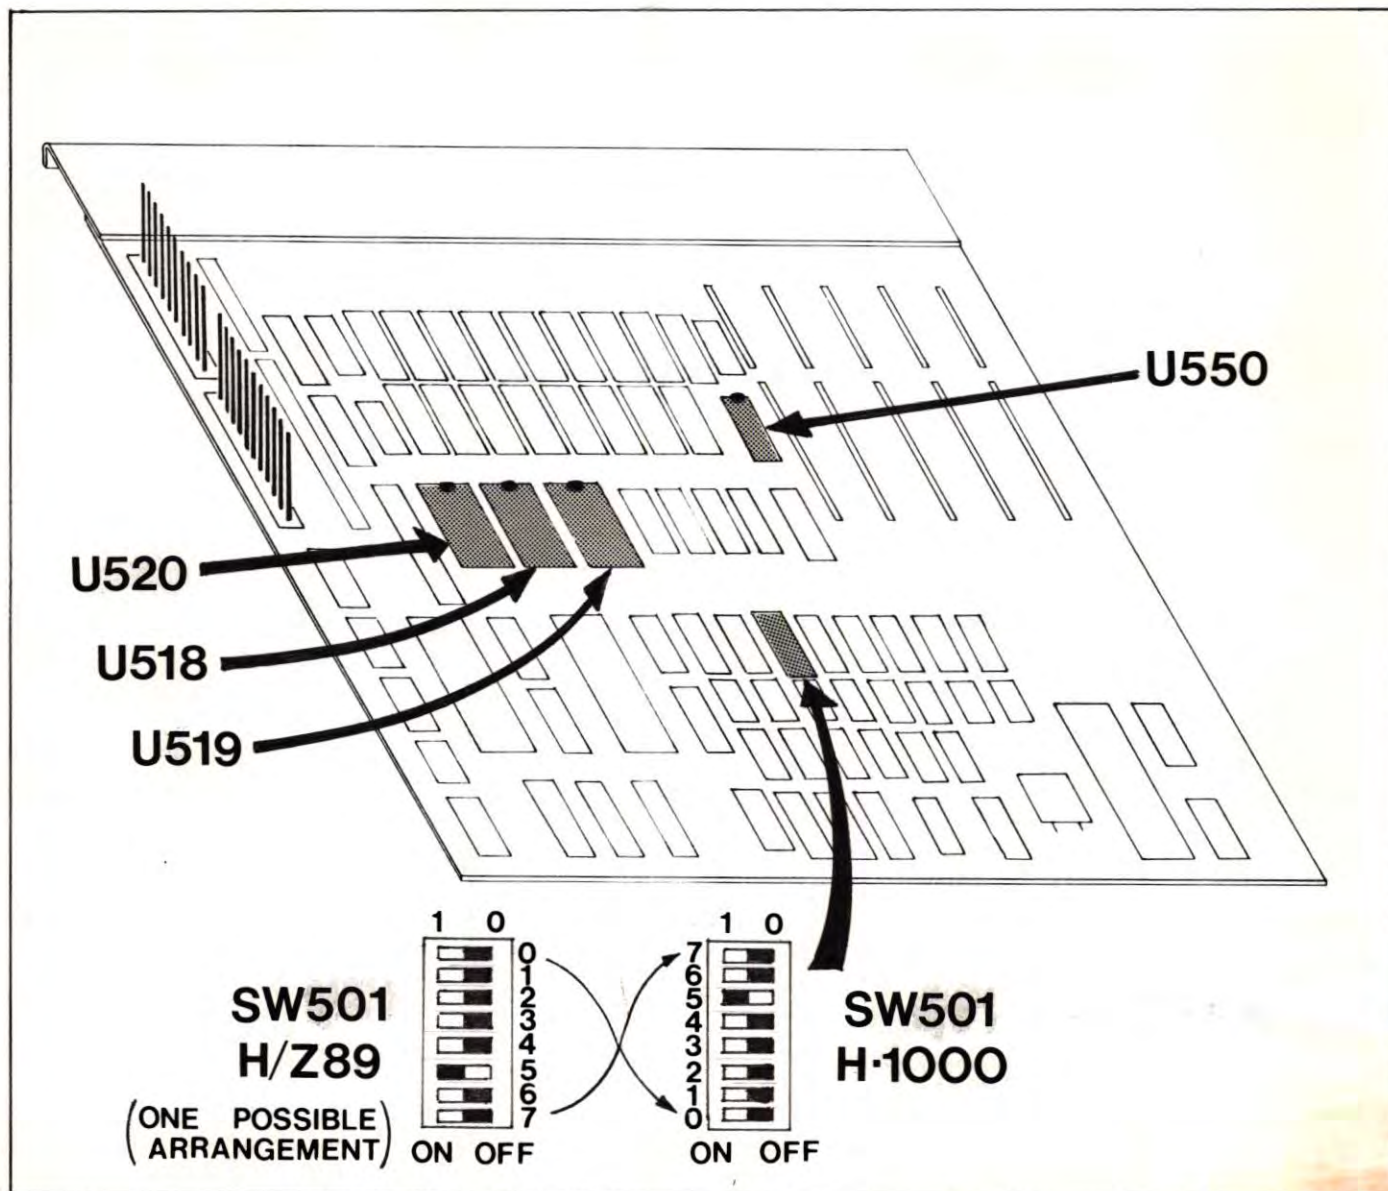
H-1000 BOARD ROM LOCATIONS
